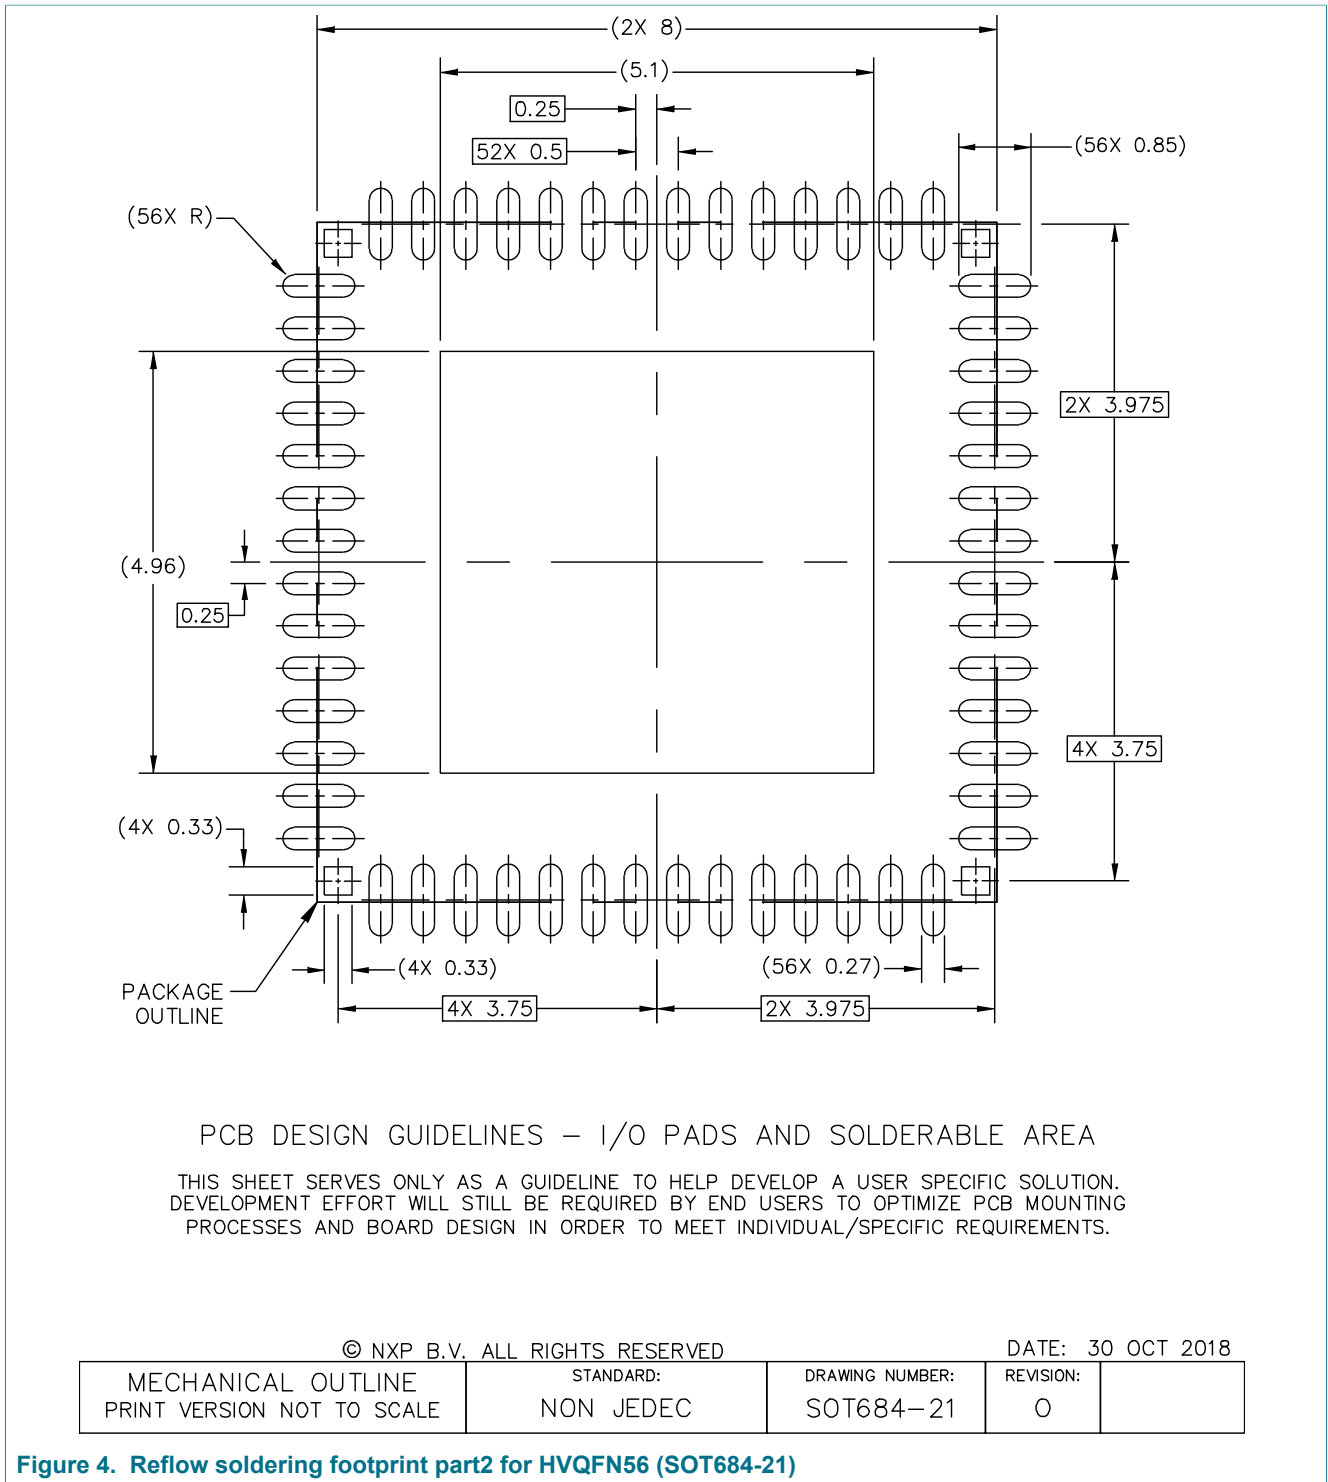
Reflow soldering footprint part2 for HVQFN56 (SOT684-21)
